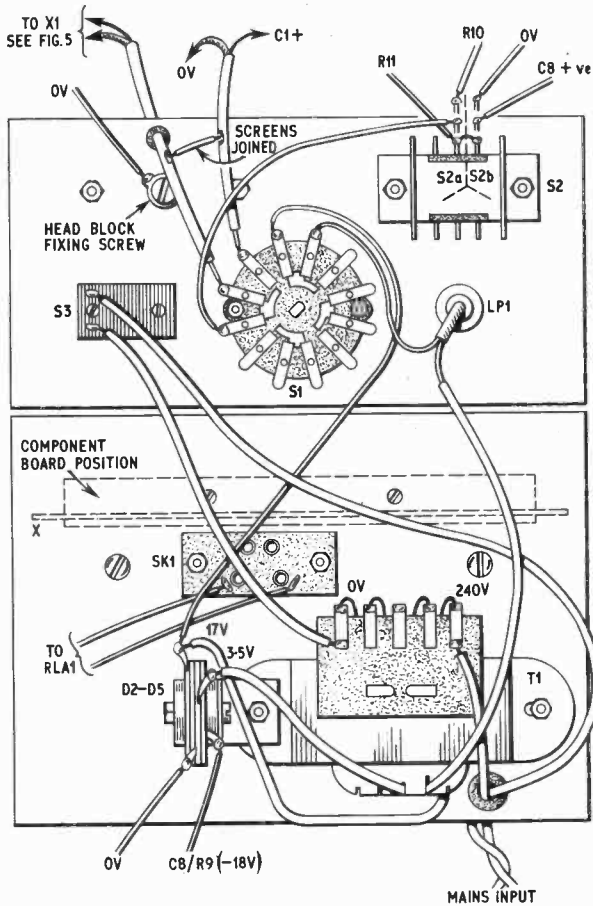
Interwiring between control panel and base plate components. For Verboard connections Fig. 6 should be consulted
